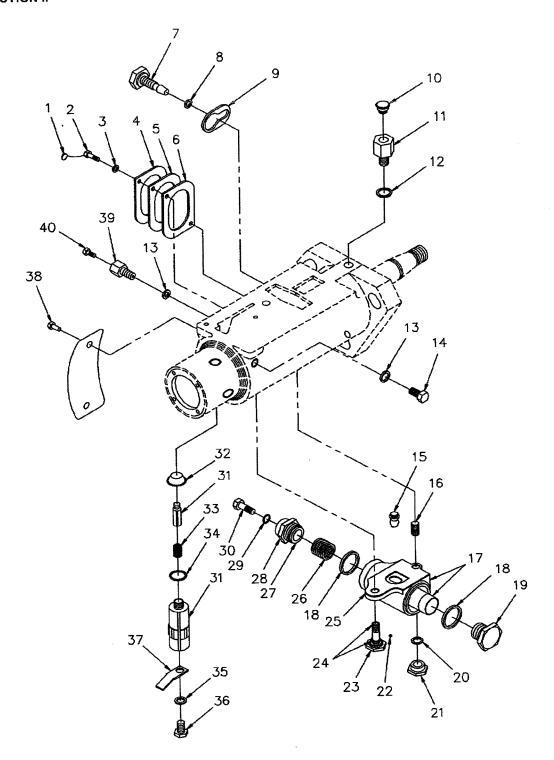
Fuel Injection Pump Hydraulic Head and Housing Attachment
